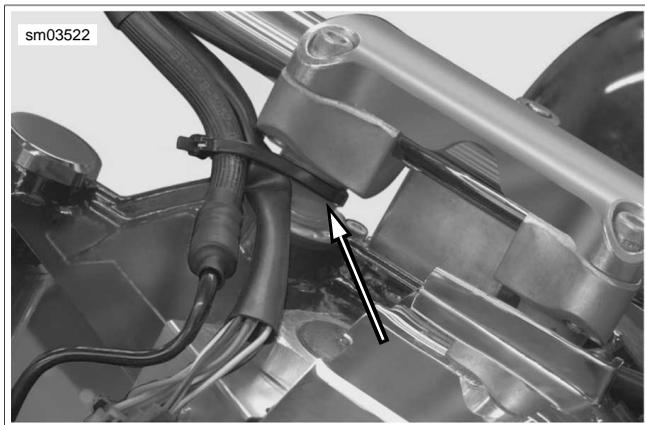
Capture Brake Hose and Right Handlebar Riser (FLHR/C)
